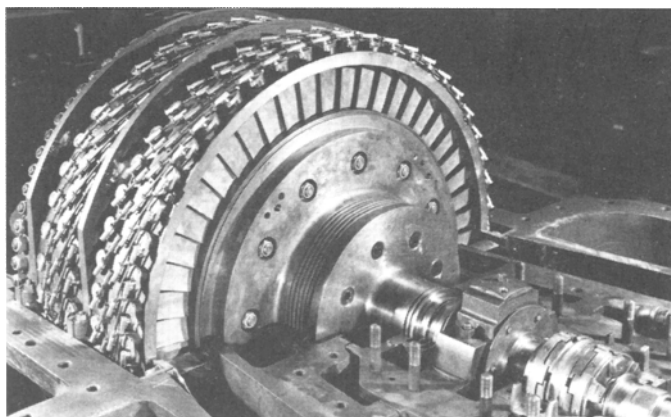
Stator blade control mechanism on four-stage axial compressor. (Used by permission: A C Compressor Corporation.)
